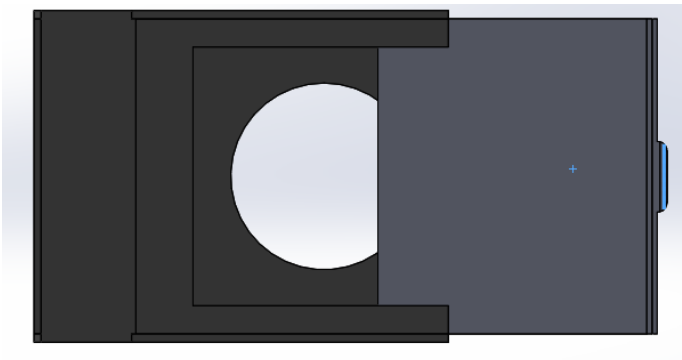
7 Bottom view of the dust bin while the removable plate moving
